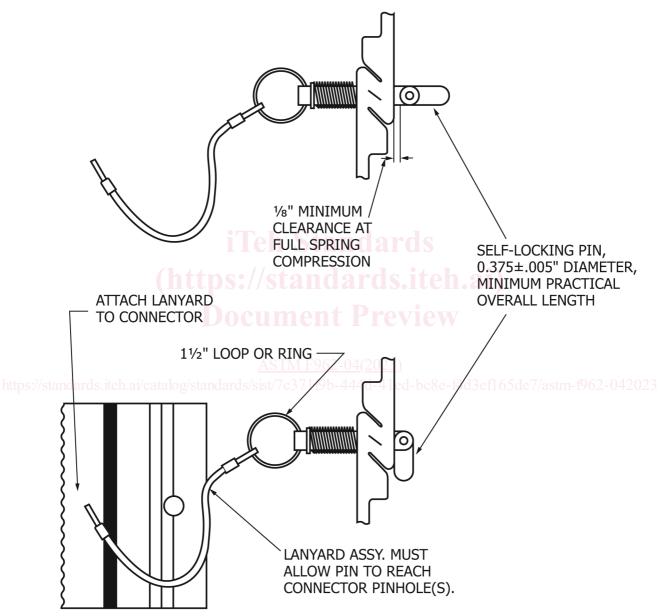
Self Locking Cross Pin / Lanyard Assembly
